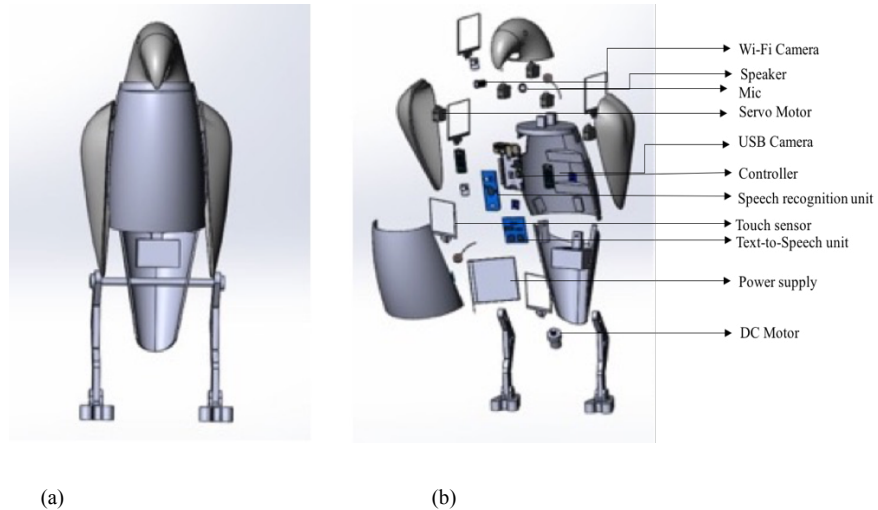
(a) KiliRo – CAD model; (b) KiliRo – Exploded view.
